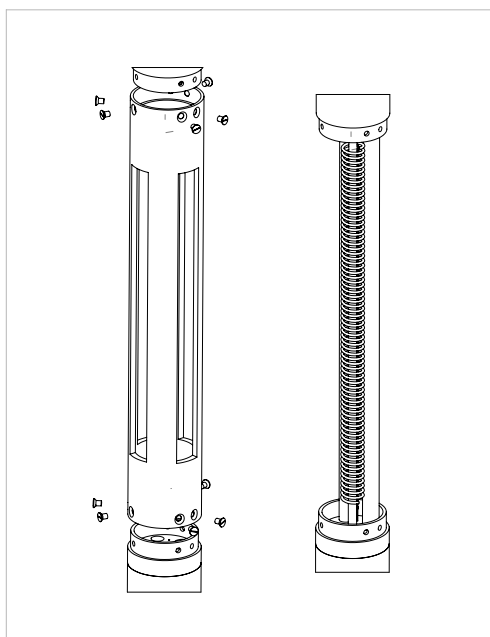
In this view, components are magnified to show how the insert is assembled. The CFT fits over a lip on the upper flange. Sunken M3-sized machine screws are connected through the holes on the CFT to the threaded holes of the upper flange, securing both components in place.
